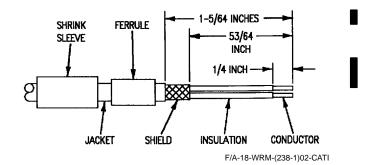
31-33449-XX and 5801-XXXX Twinax Connector Repair (Sheet 3)
